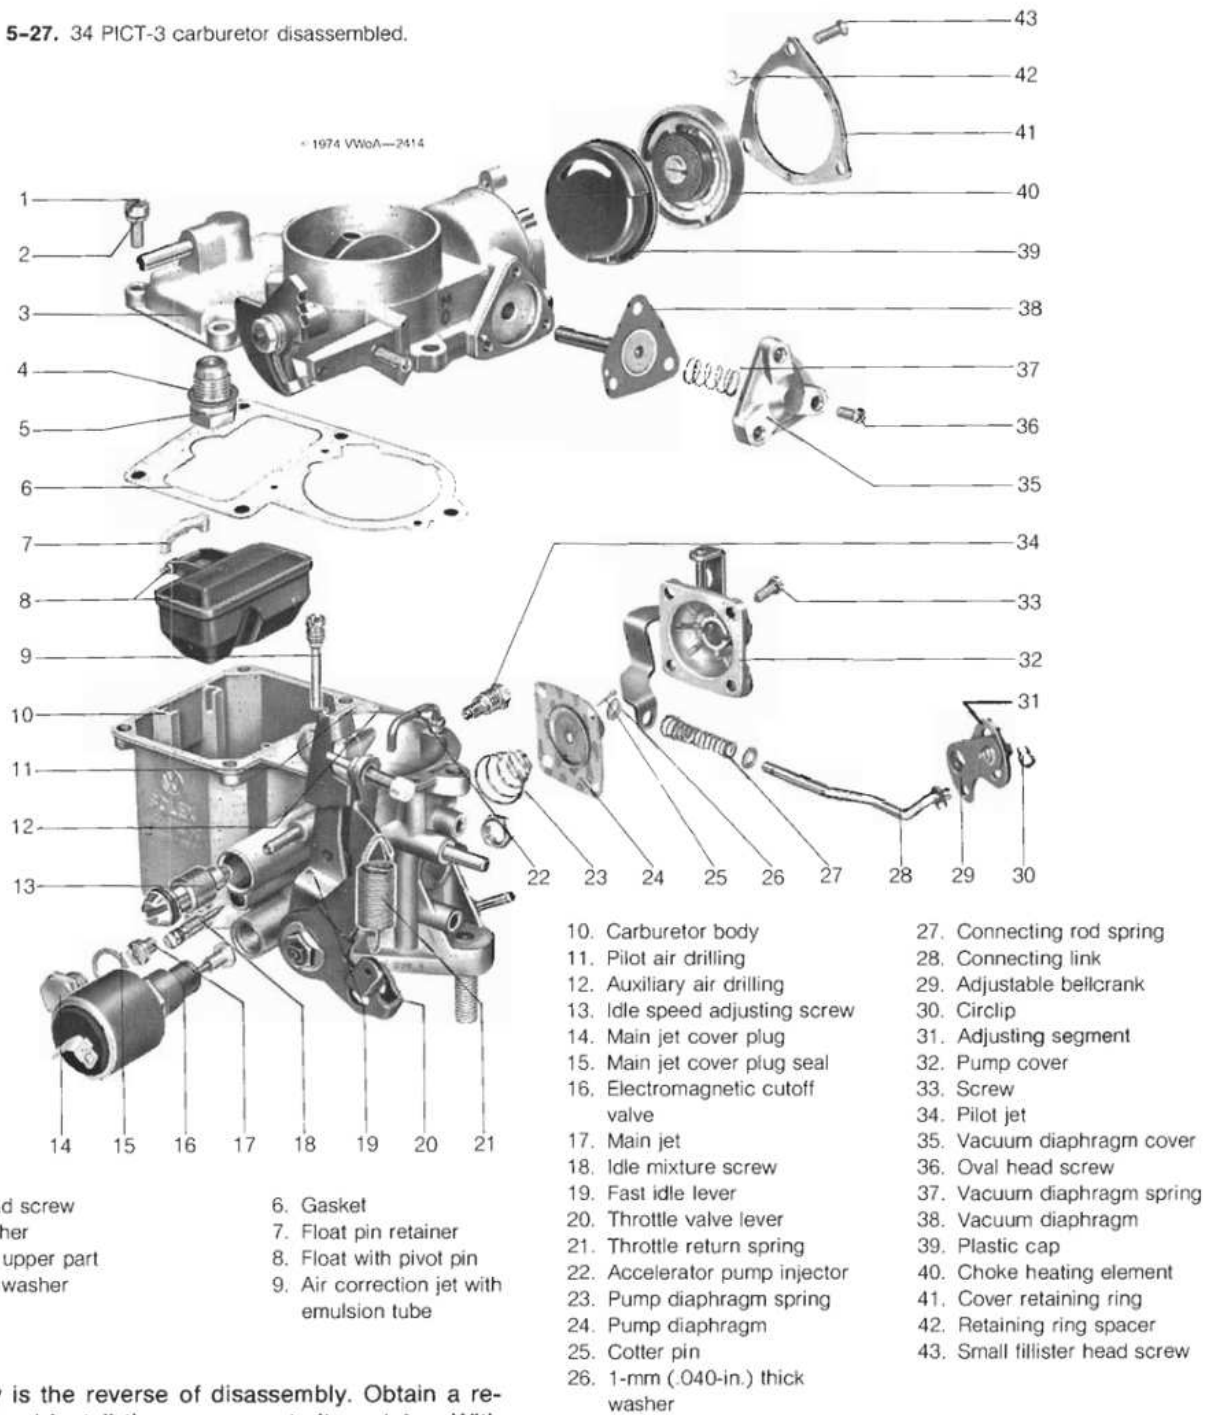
34 PICT-3 carburetor disassembled.
